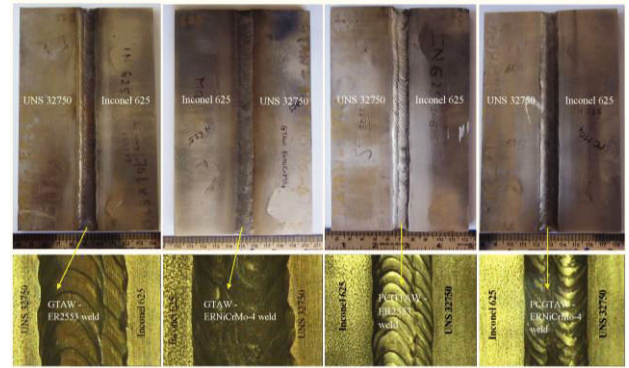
Photographs showing the dissimilar weldments of Inconel 625 and UNS 32750 by CCGTA and PCGTA welding techniques employing ER2553 and ERNiCrMo-4 filler.
